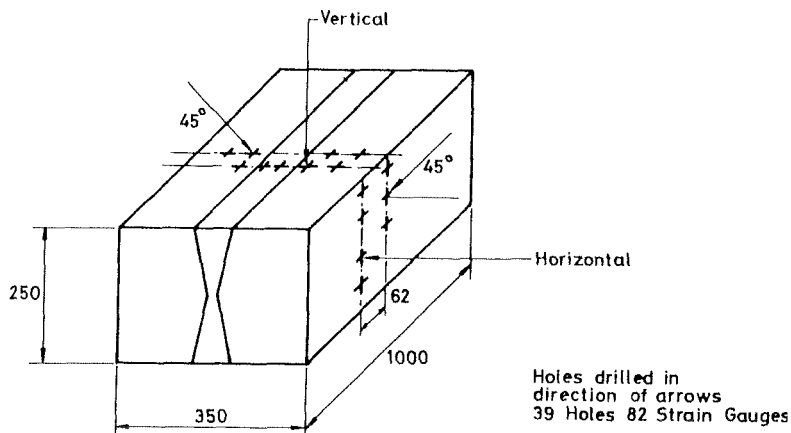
Hole drilling/sectioning by Ferrill et al.
